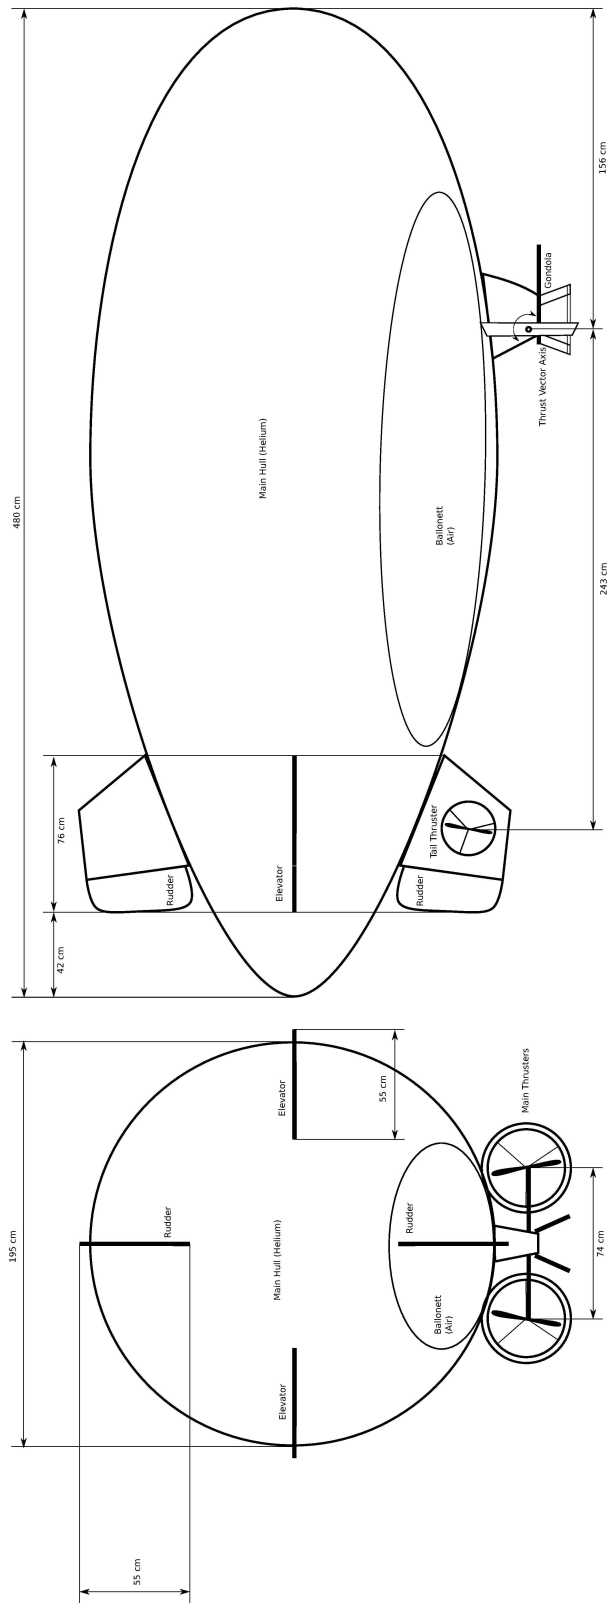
Our blimp prototype, physical layout and dimensions.
